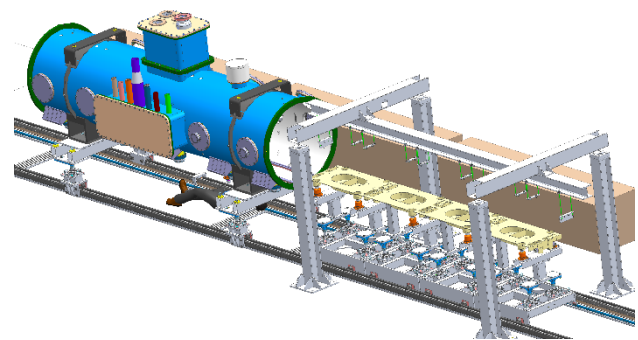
Tooling used for the insertion of the cold mass inside the vacuum vessel.
